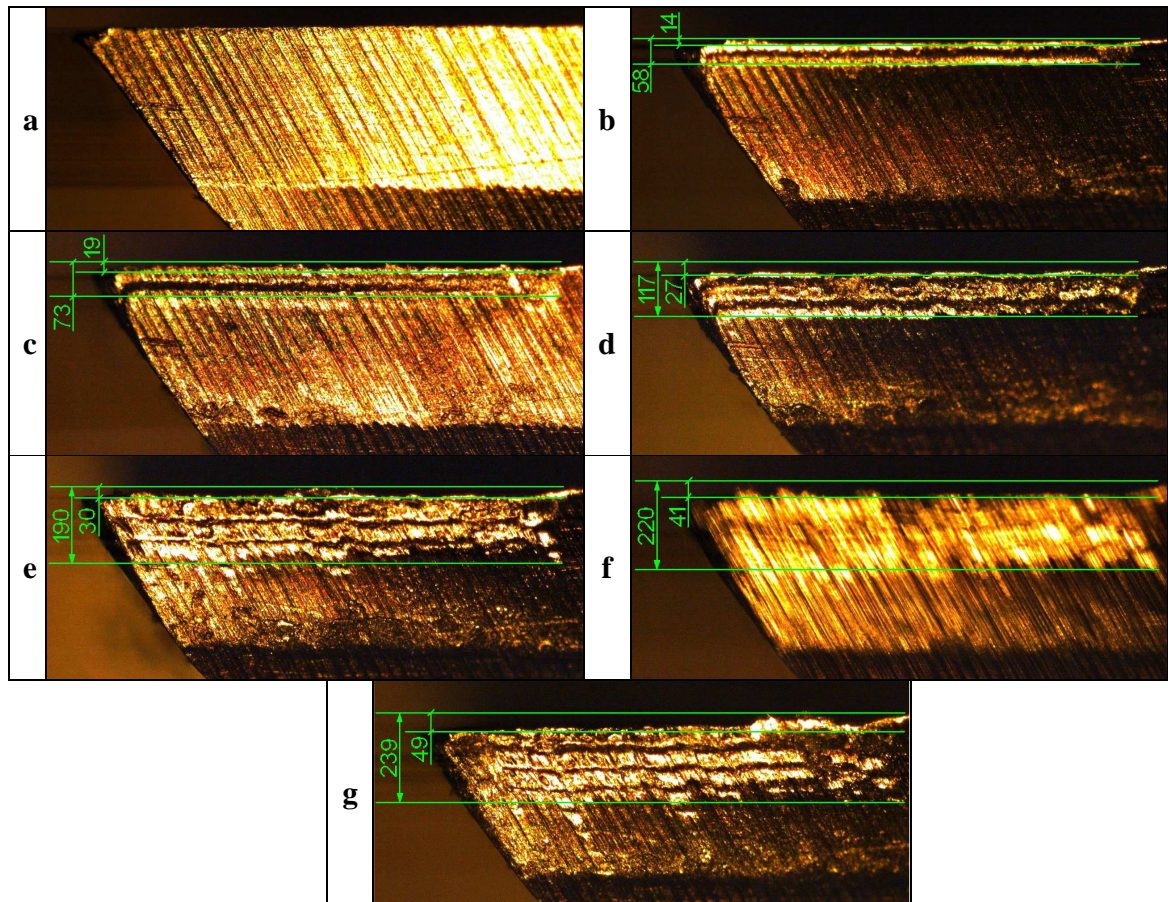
MTE 9mm end mill tooth # 4 linear toolpath clearance face wear a) Fresh tool, b-g) After pass 1-6 (each 162 mm length, 9 mm width, 1 mm depth).
